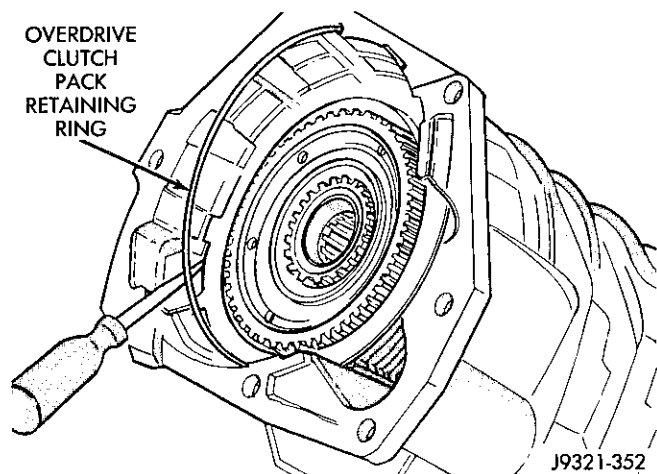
Overdrive Clutch Pack Retaining Ring Installation
